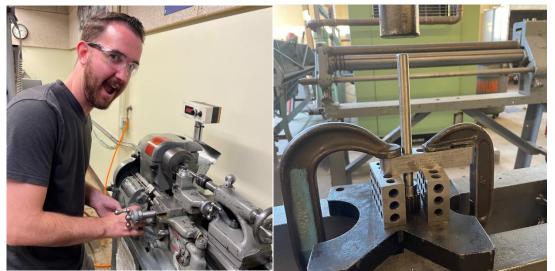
Turning pinion shaft (left) and press fit fixture for mounting pinion to completed shaft (right)
